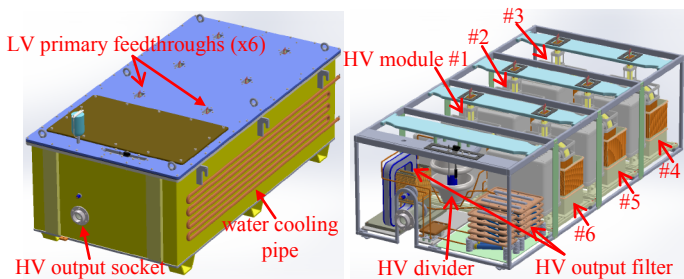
Complete HV oil tank assembly: Left – external view; Right – Internal view
